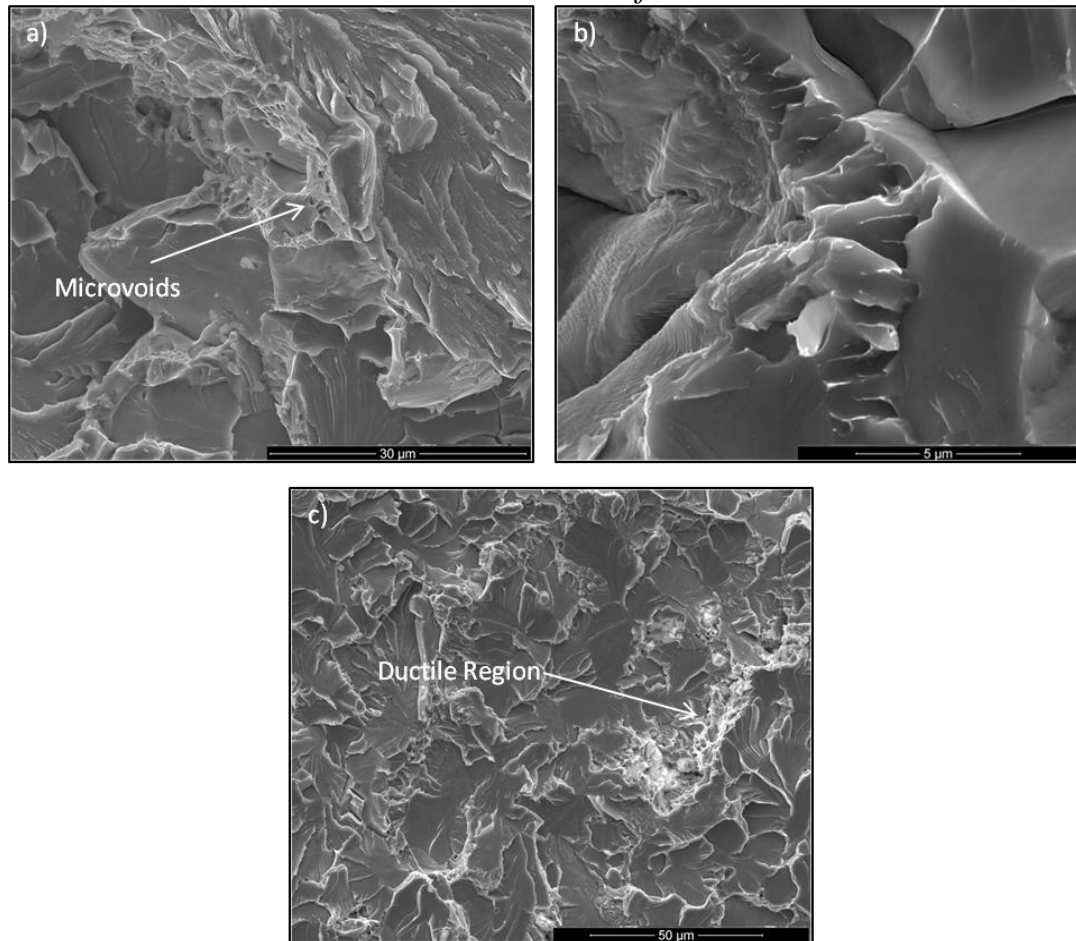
Fracture Surface of 25Cr-75V 3-point Bend Specimens
